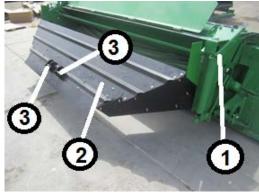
Forming Shield Installation Key 1 – Platform Key 2 – Forming Shield Key 3 – Mounting Locations for Pivot Arms
